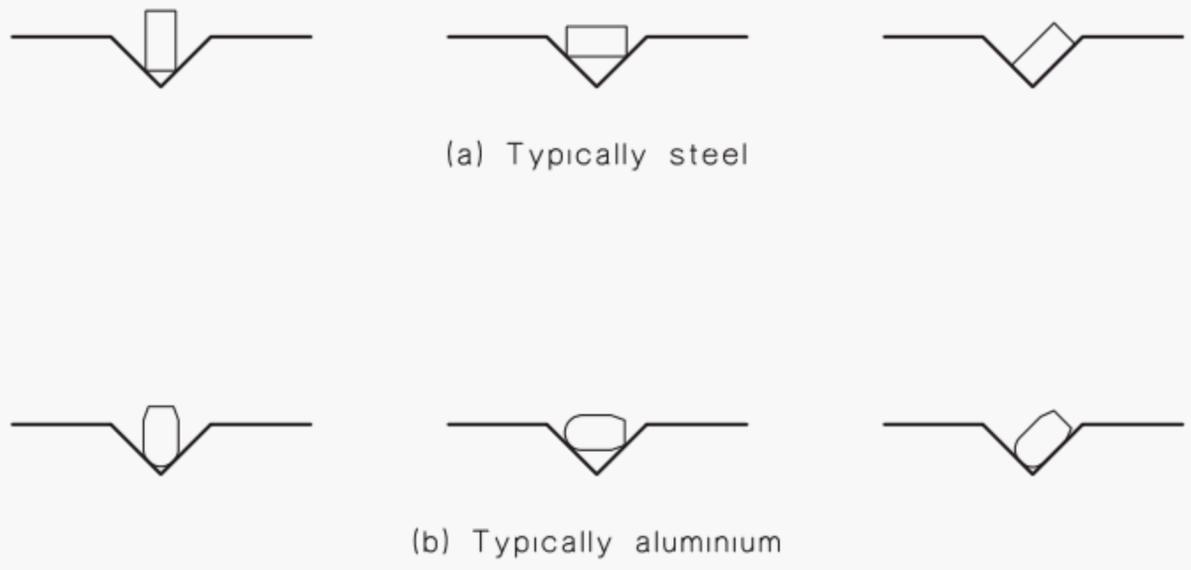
DIRECTION OF SHEAR TEST CHORD POSITIONING
